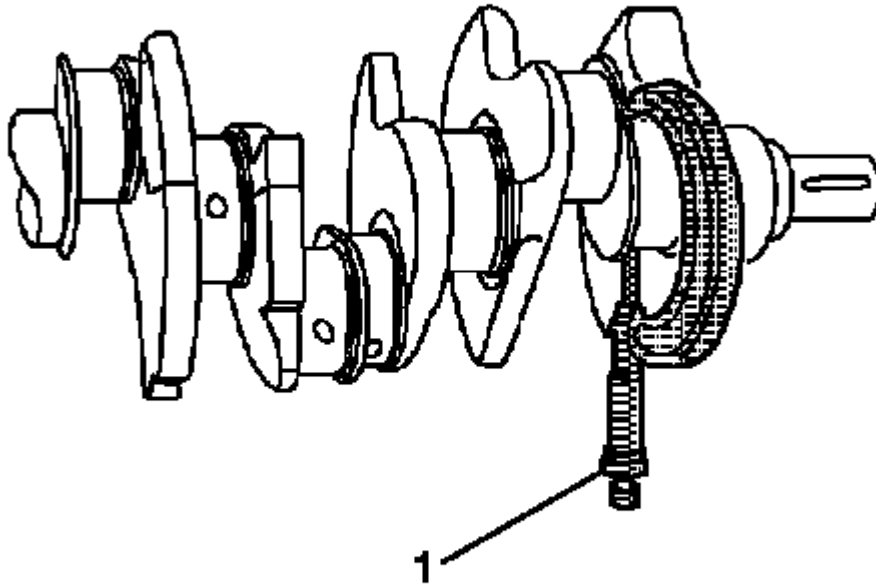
View of Measuring Crankshaft Bearing Journal Using Method A
